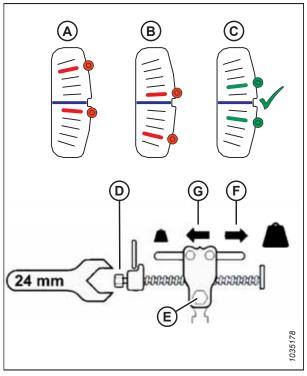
Left Wing Balance Adjustment Checker Plate
